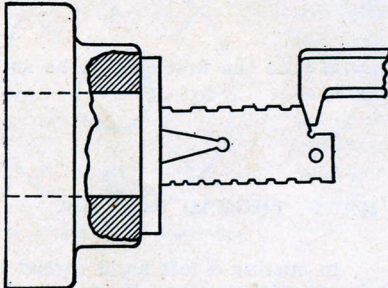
Setting an Acme Threading Tool for Internal Threading
